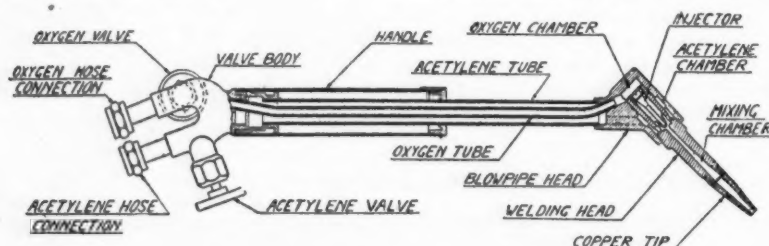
Blowpipe designed for welding and intended for operation on low pressure acetylene
